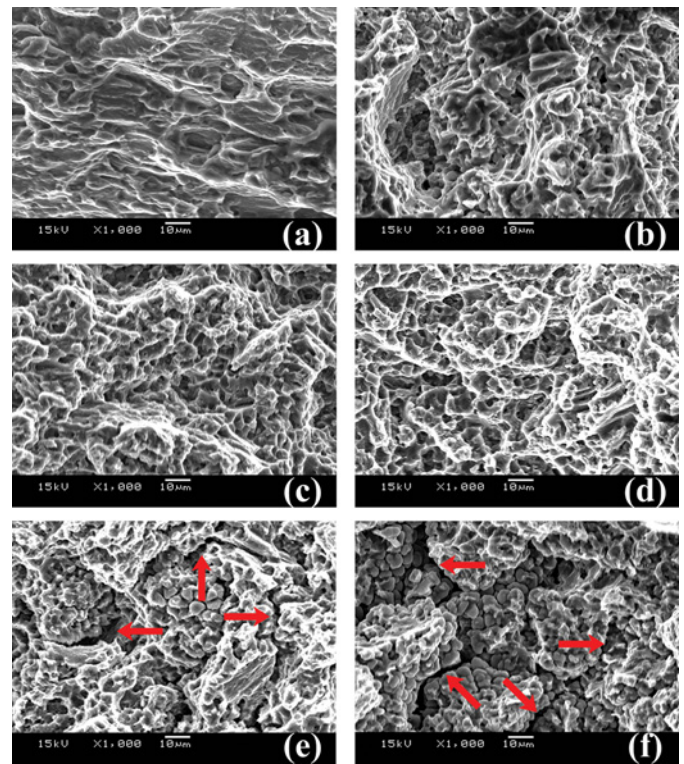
Observations on fractured surfaces of BM and welds at different welding speeds: (a) BM; (b) 2,000 mm/min; (c) 3,000 mm/min; (d) 4,000 mm/min; (e) 5,000 mm/min; and (f) 6,000 mm/min (color figure available online).
